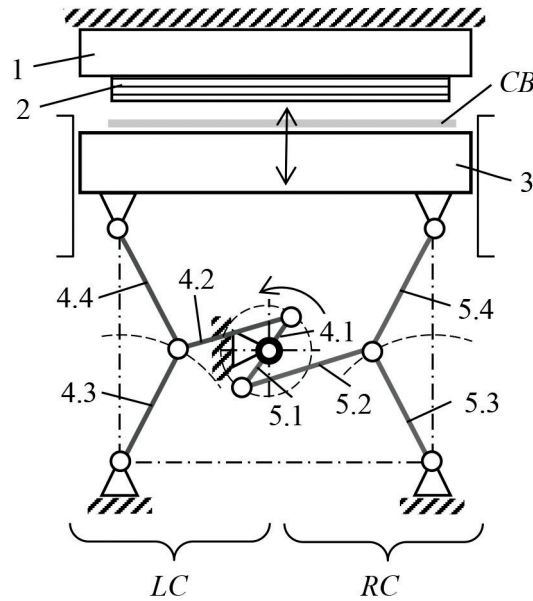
Kinematic scheme of a die-cutting press equipped with a pressure plate drive with wedging mechanisms of the left and right circuits
